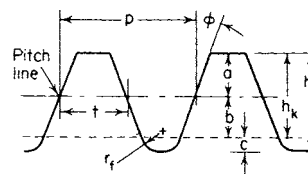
Basic rack for involute gear systems. a = addendum; b = dedendum; c = clearance; h_k = working depth; h_t = whole depth; p = circular pitch; r_f = fillet radius; t = tooth thickness; ϕ = pressure angle.
